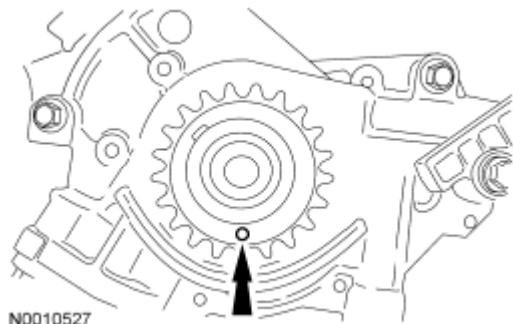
Locating Crankshaft Sprocket Timing Mark In 6 O'Clock Position
